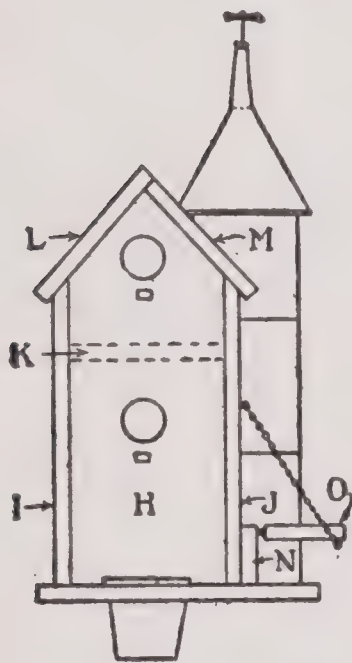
End View of Bird Castle shown in Fig. 484, with One Tower in Position.
